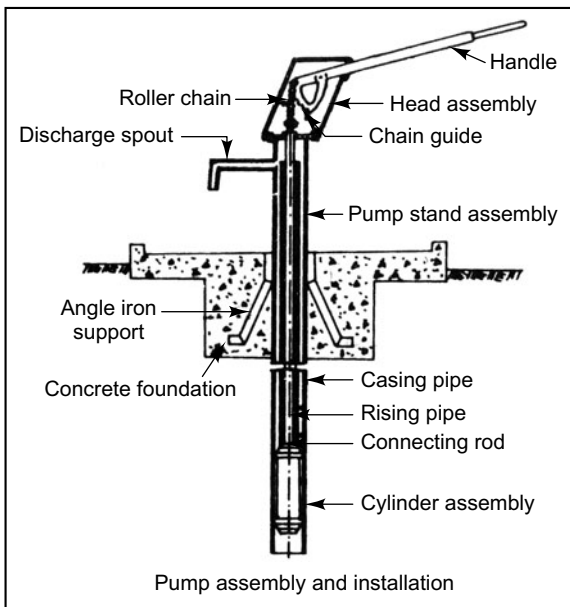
Details of construction, installation and sectional view of an India Mark II deep well pump assembly
